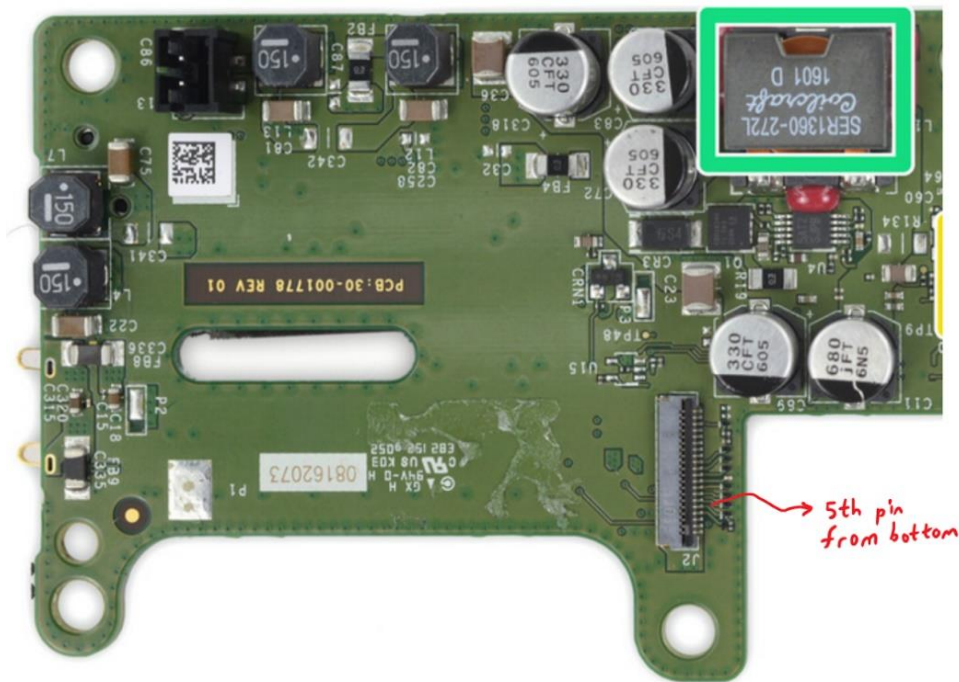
Pin for Power button (5th pin) on the Flat-flex Connector on the Tap PCB
